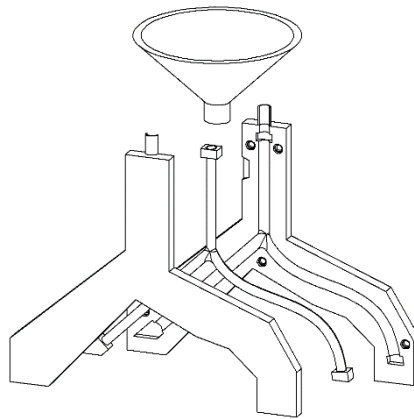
Bifurcated vein mould, including inner mould.
